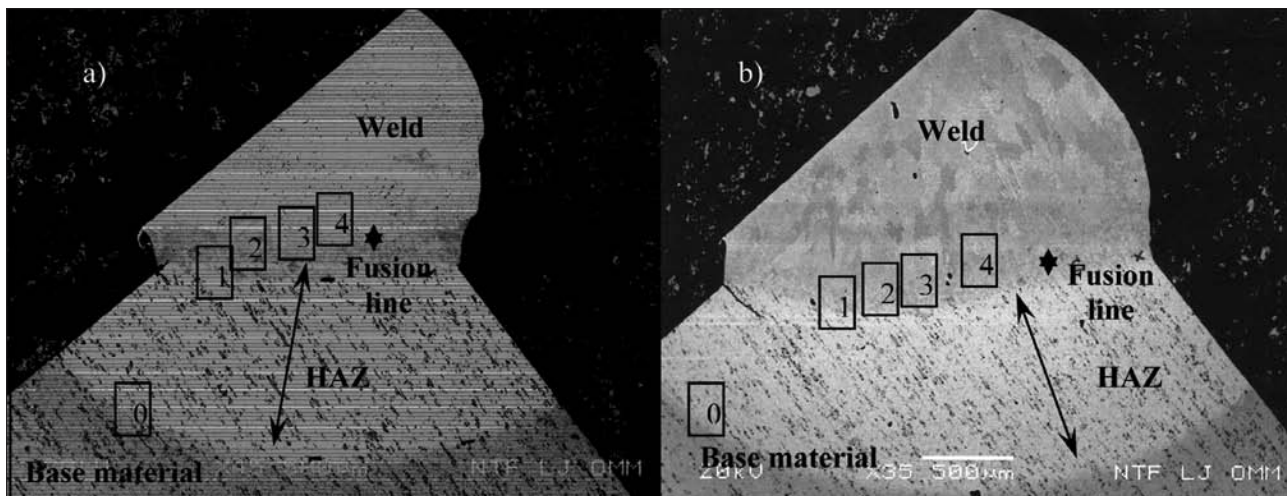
Macrostructure on the cross section of the surface weld on the steel tool; a) micro-plasma, b) TIG; SEM, BSE (image of back scattered electrons)
